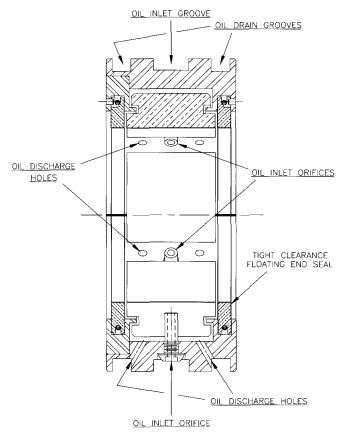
Flooded Pressurized Housing Design with Oil Inlet Nozzles.
